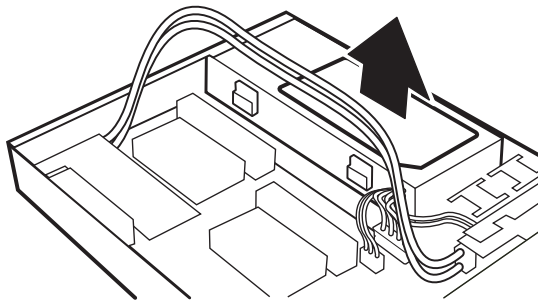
Lifting the SAS Cables Out of the Clamps
